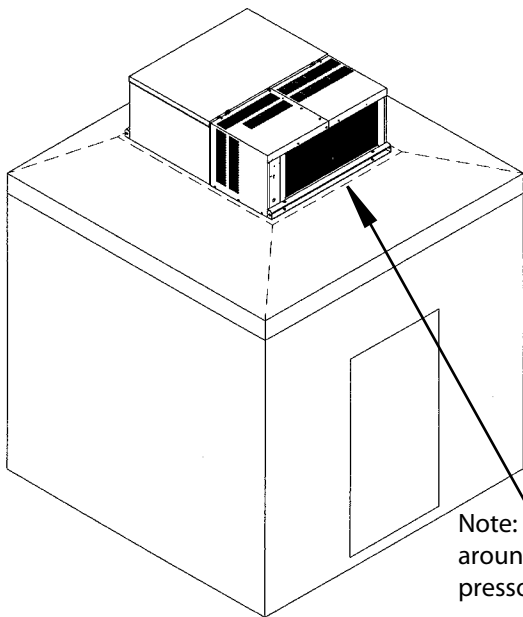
PTT unit placed on roof of walk-in cooler. (see rigging instructions).
